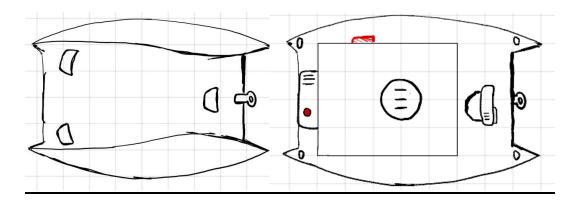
Additional View: Bottom View Figure 6 Additional View: Top View
